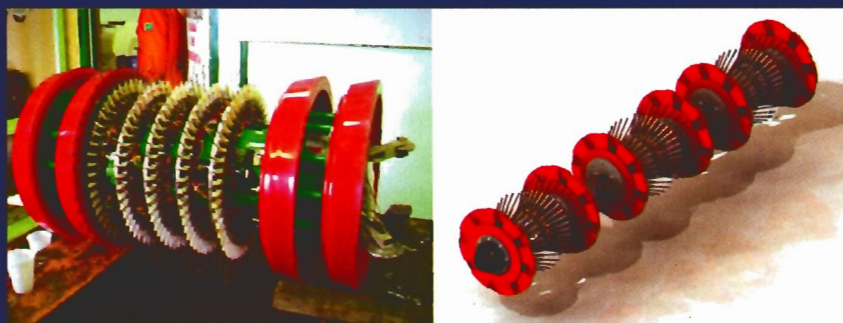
(a) Feeler pig for 22-in., with 250 sensors (sticks); (b) Feeler pig for 12 to 16-in., with 180 sensors (sticks).
